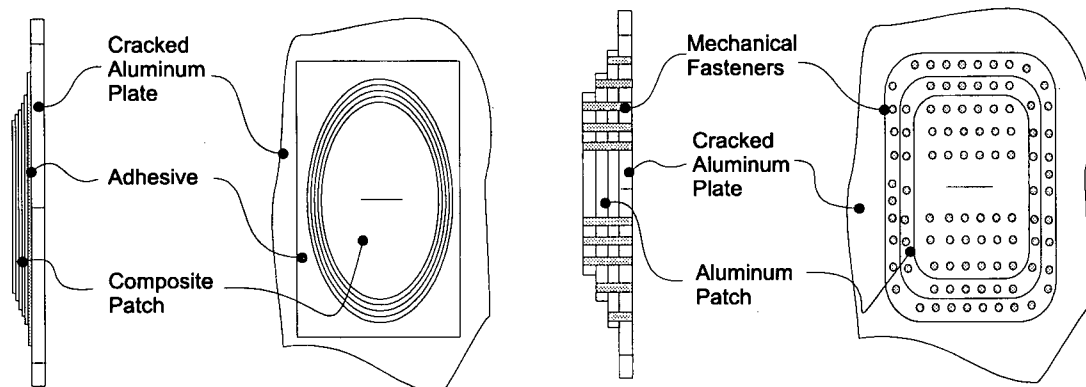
Bonded (left) and mechanically fastened (right) repairs
